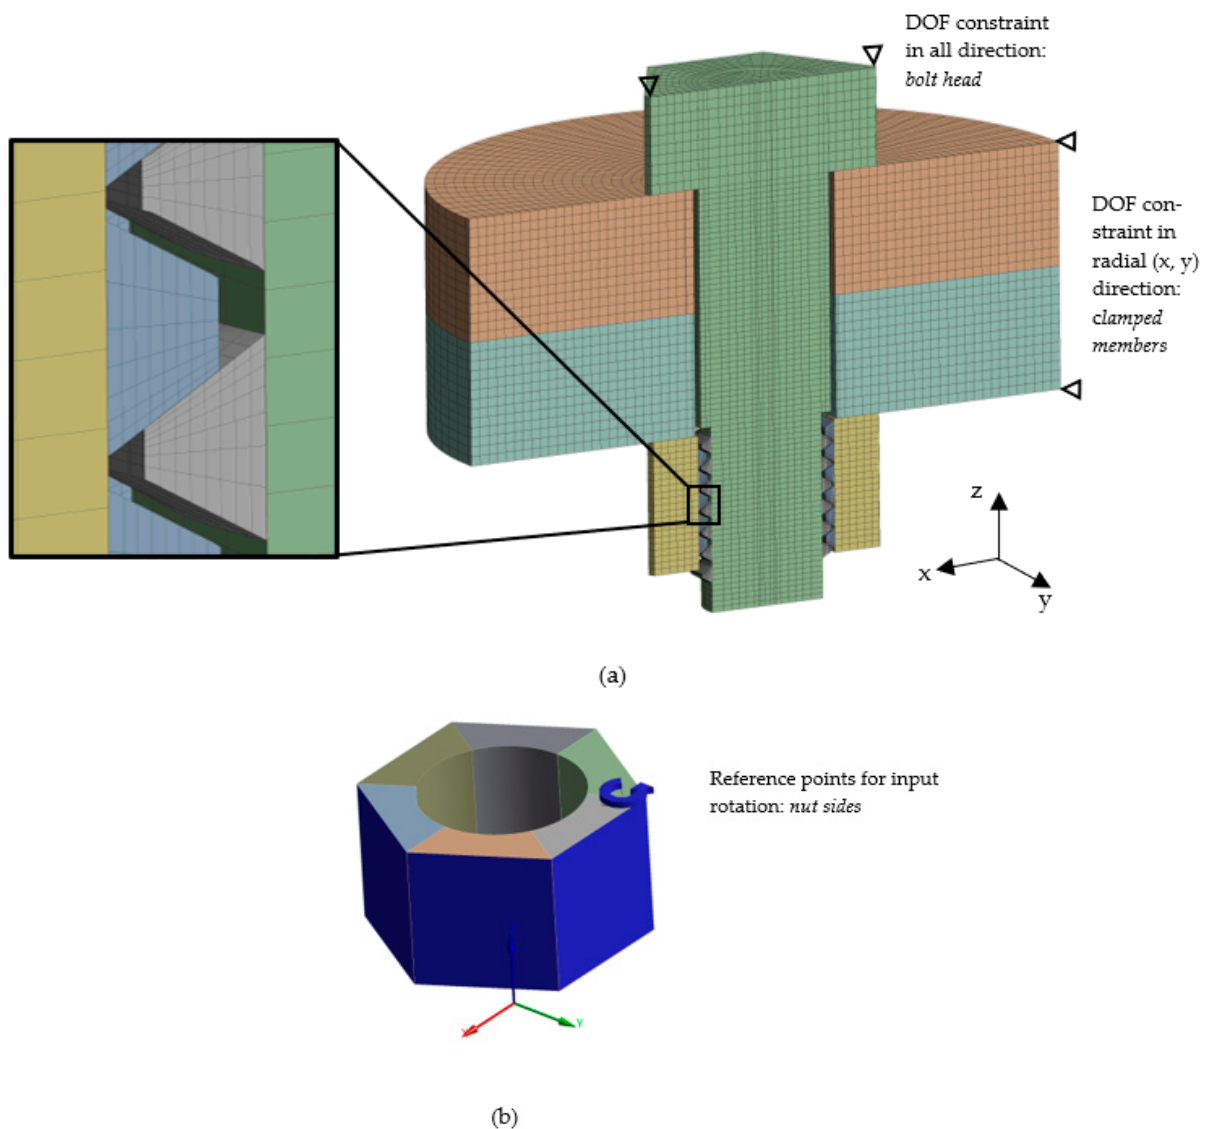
Three-dimensional FE model of bolted joint showing engaged thread elements: (a) complete model with constraints and thread mesh details; (b) nut rotation.
